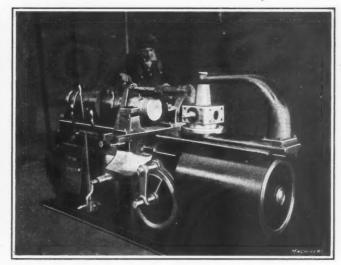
Potter & Johnston Automatic Lathe turning Pistons
